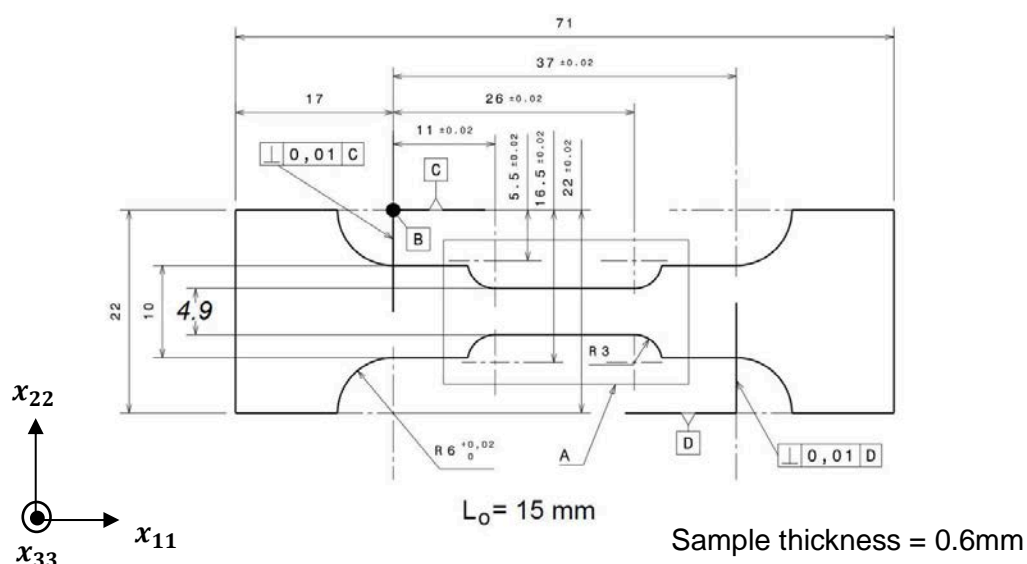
Technique drawing of dog-bone shape sample for tensile test on Ti-18.
